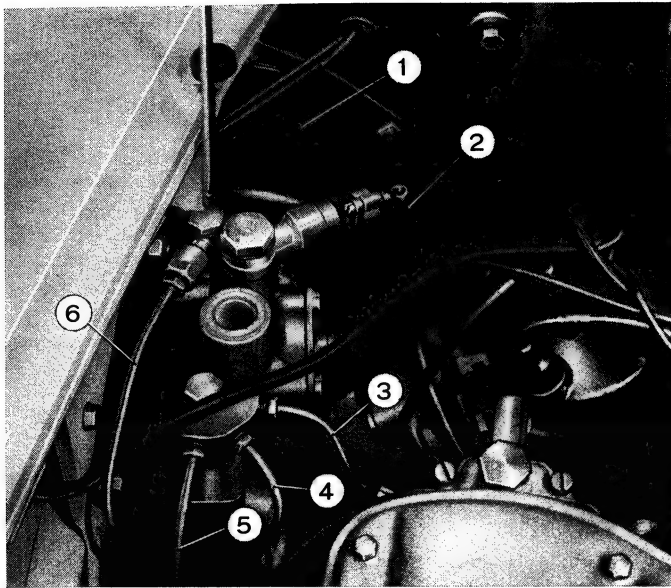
Detail of brake booster mounting on 1500 Cabriolet.
